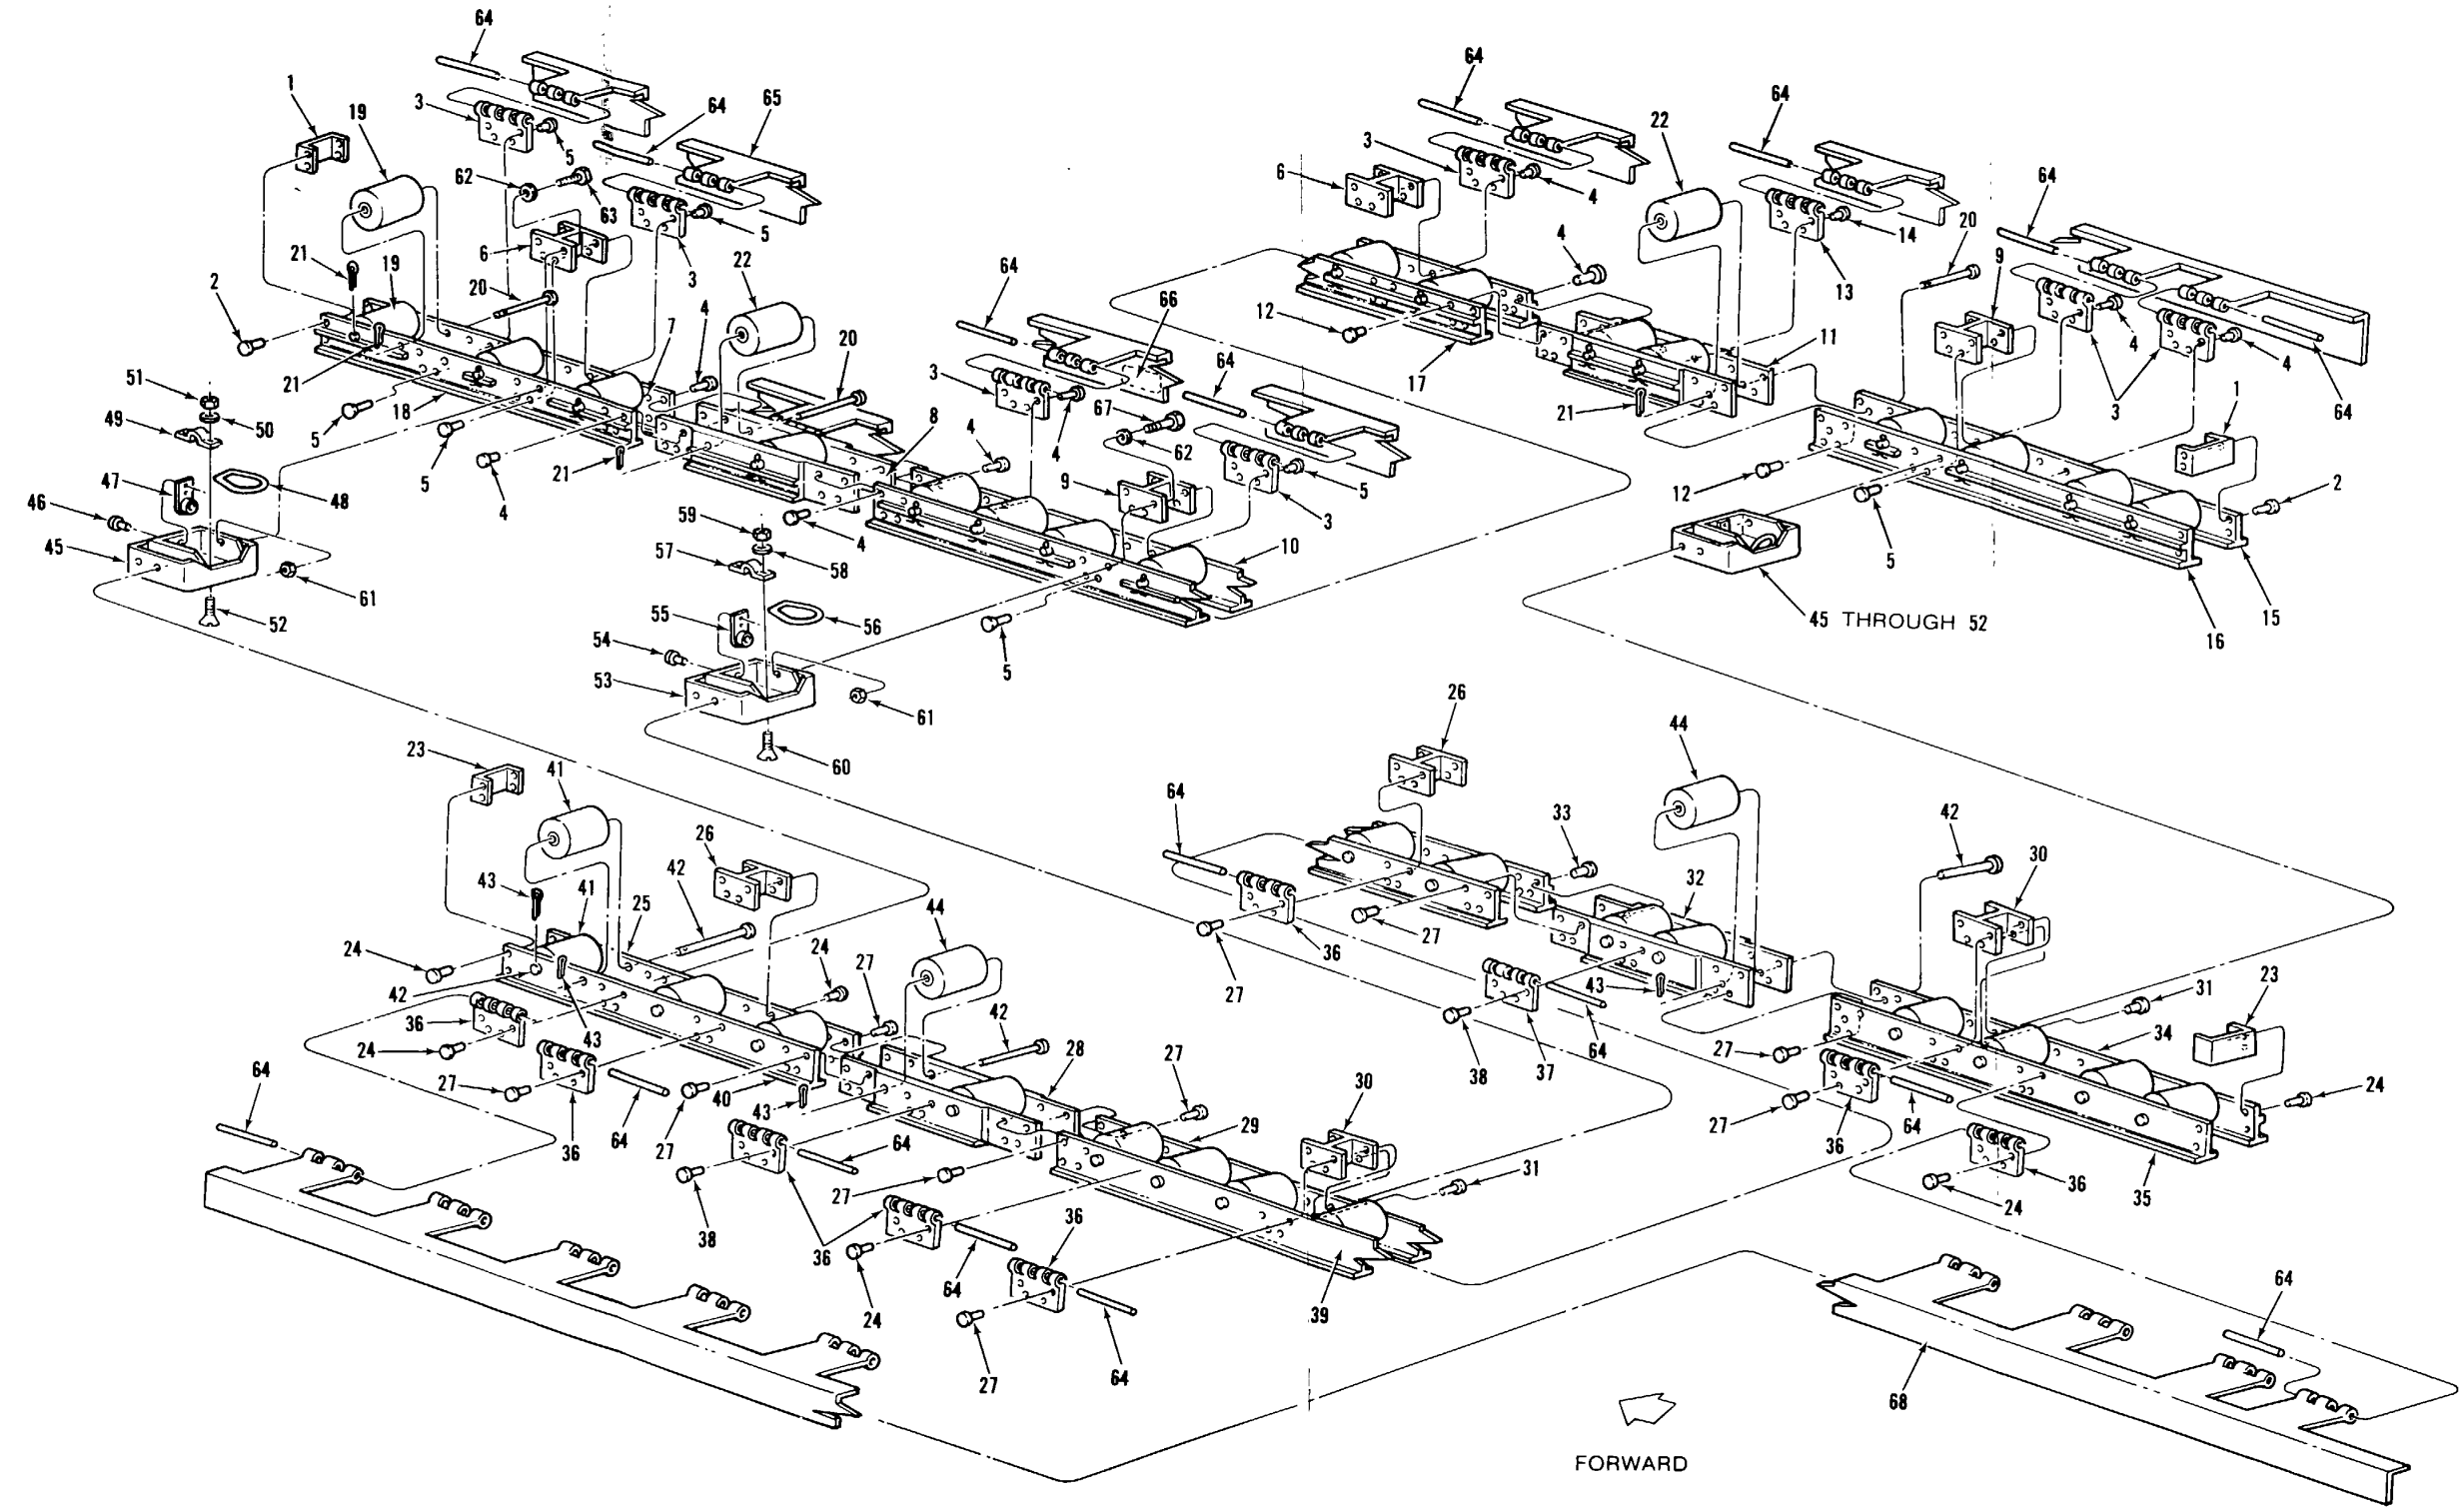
Inboard Guide/Roller Assembly Stations 157.750 to 272.188
